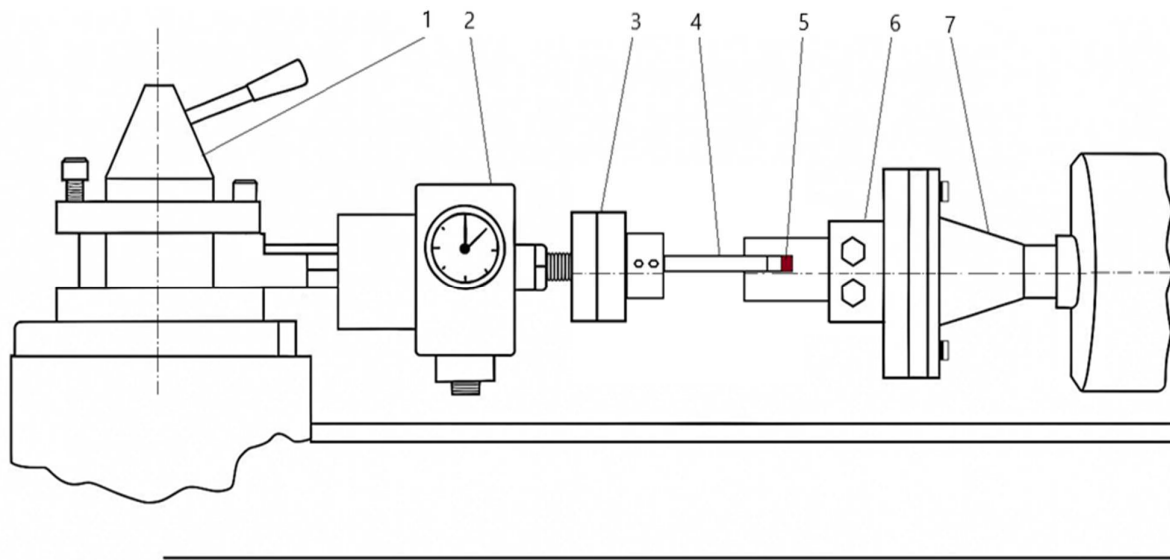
Side view of the device designed to track the evolution of the shear force magnitude: 1- lathe tool holder, 2- dynamometer, 3-punch clamping subsystem, 4-punch, 5-workpiece, 6-workpiece clamping subsystem, 7-moving headstock.
